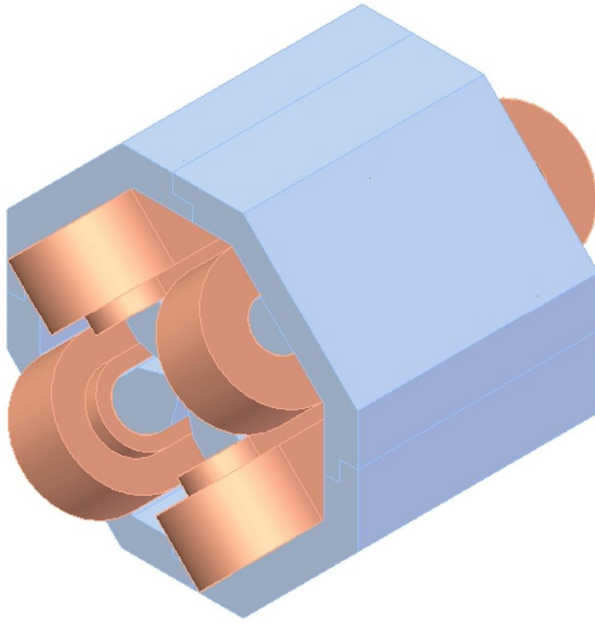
CAD Drawing of 1.26Q12 Quadrupole Magnet
